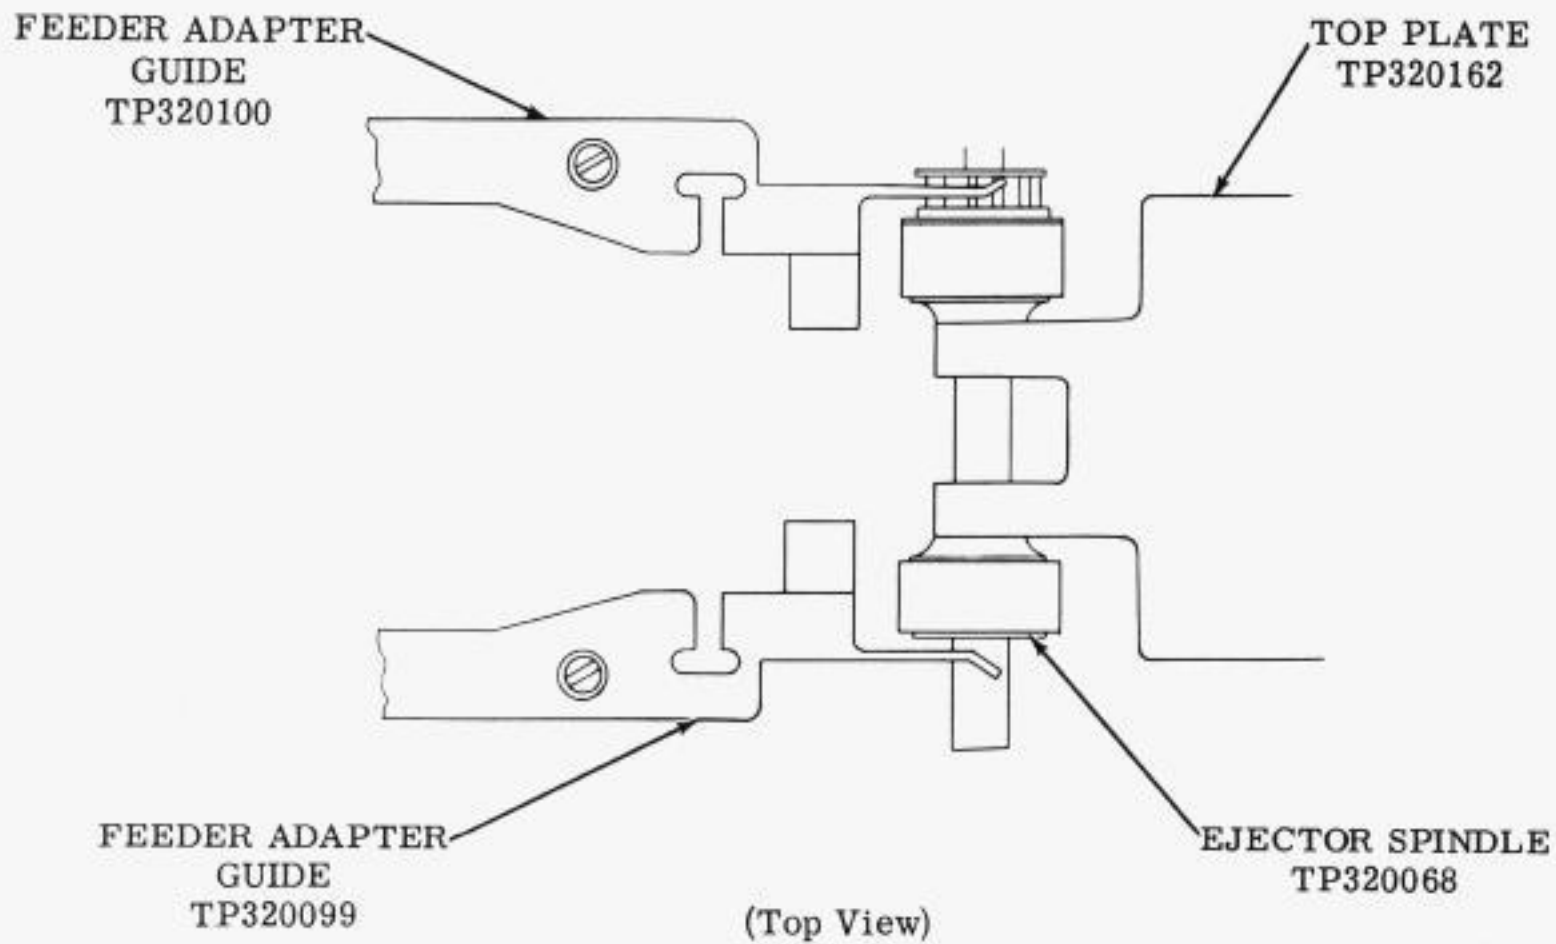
Feeder Ejector Spindle and Adapter Guides
